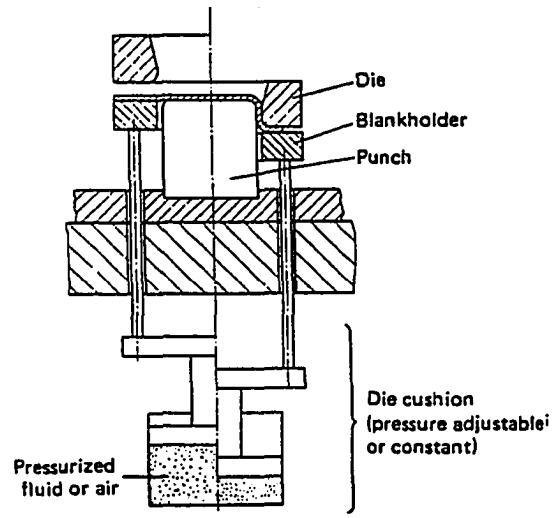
Tool arrangement for deep drawing, [Lange, 1985].
